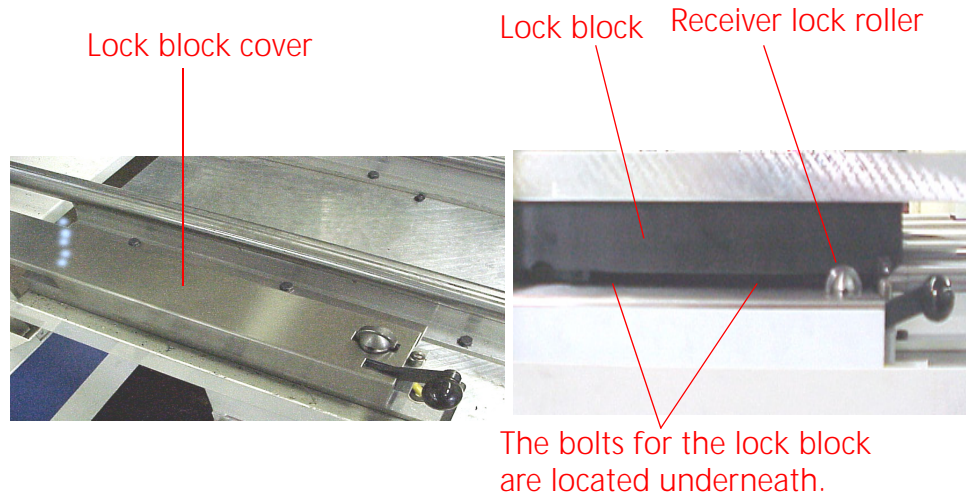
Remove Cover; Loosen Bolts; Slide Stop Block Over Roller
